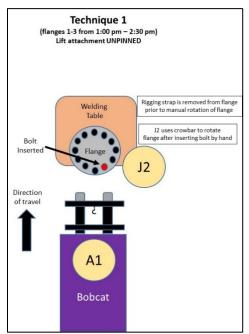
Technique 1 used for flange lifts 1–3 from 1:00PM–2:30PM.
